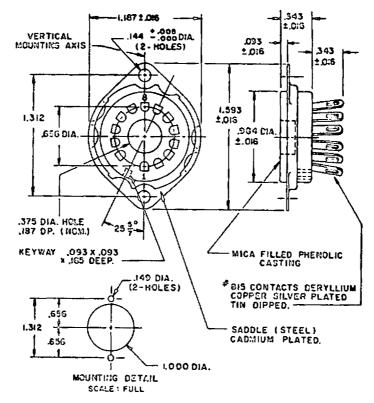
GENERAL PURPOSE SOCKET, SK-112
